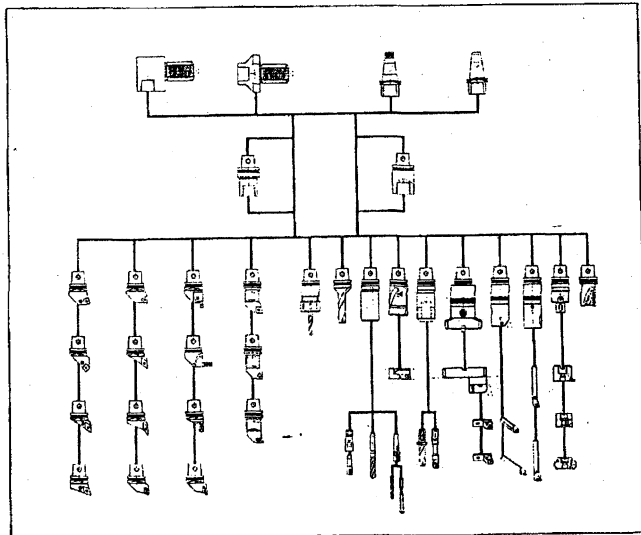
The Widatex universal tooling system for turning, drilling, boring and milling (Courtesy of Krupp Widia)
